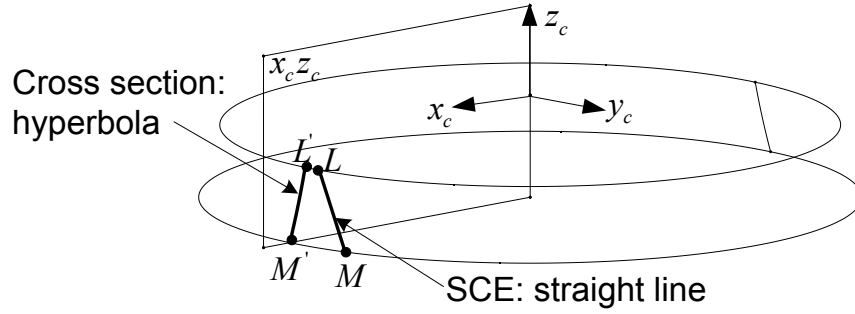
Cross section of tool surface revolved by SCE on $x_c z_c$ plane.
